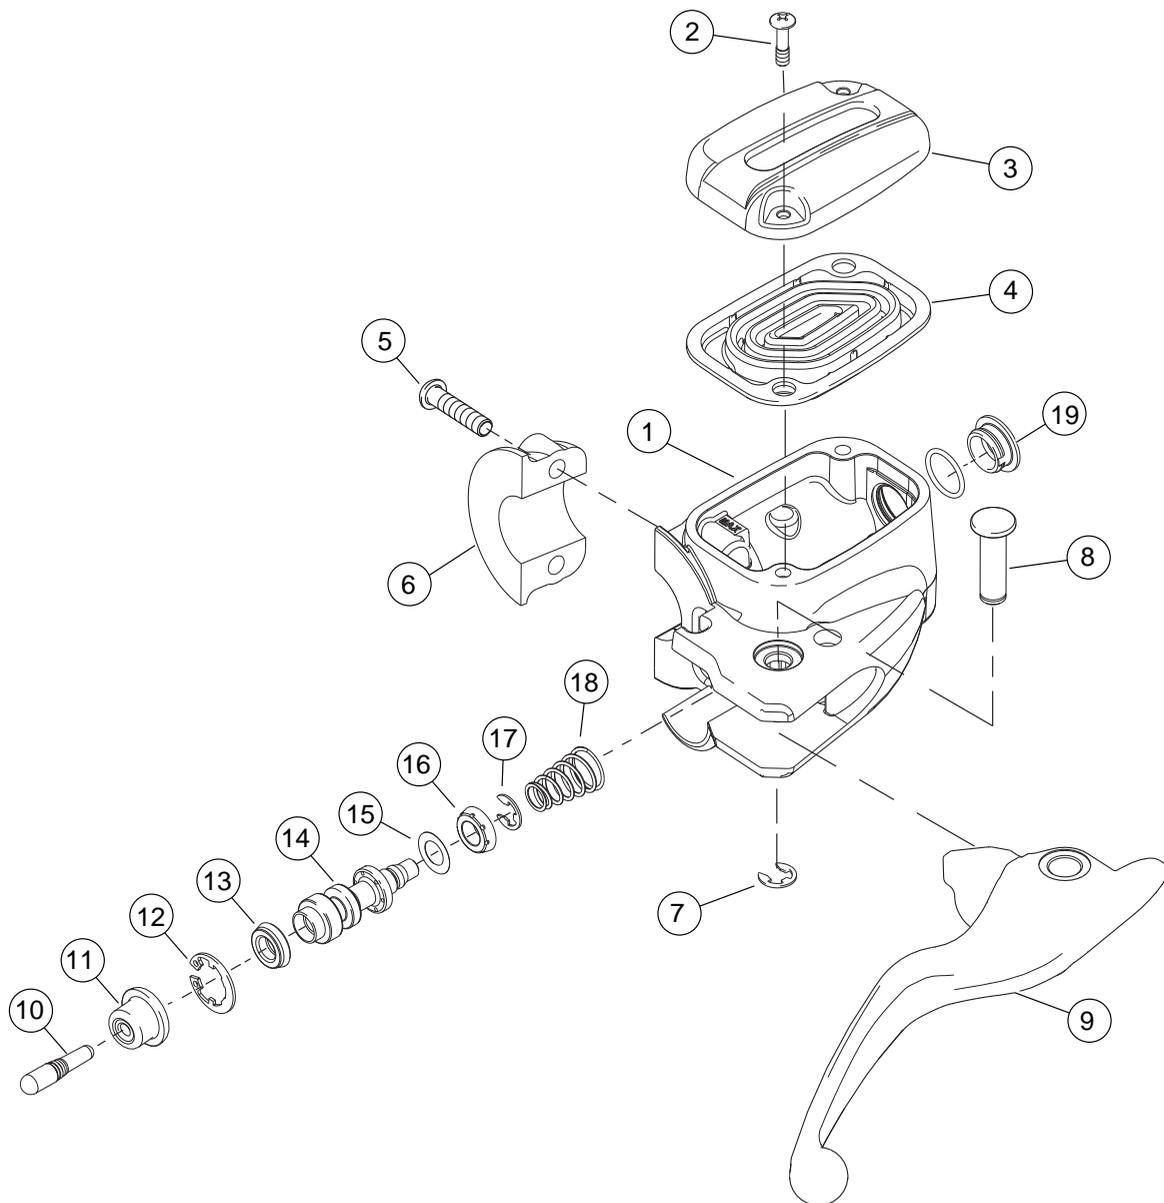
Remove Master Cylinder/Brake Lever Assembly
